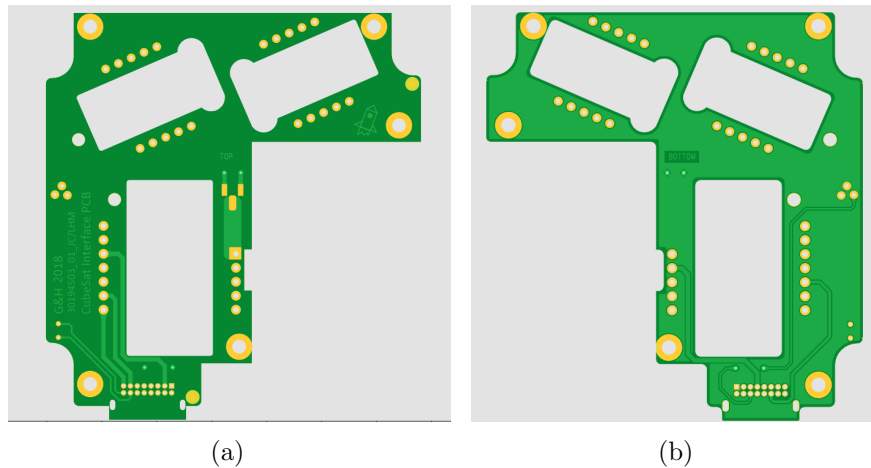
CubeCAT laser engine PCB top view (a) & bottom view (b).
